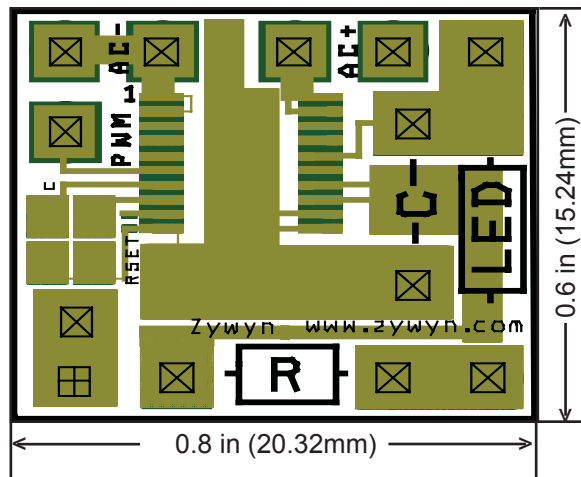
ZD831EVB Single-Layer Evaluation Board Component Side Layout
